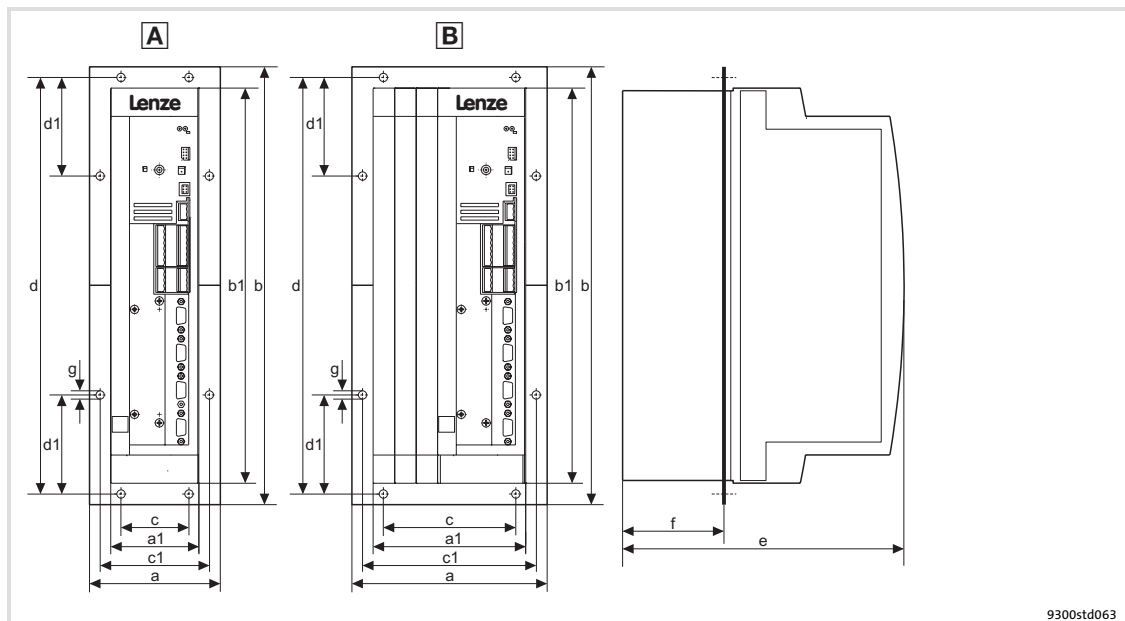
Dimensions for thermally separated mounting 0.37 ... 11 kW
